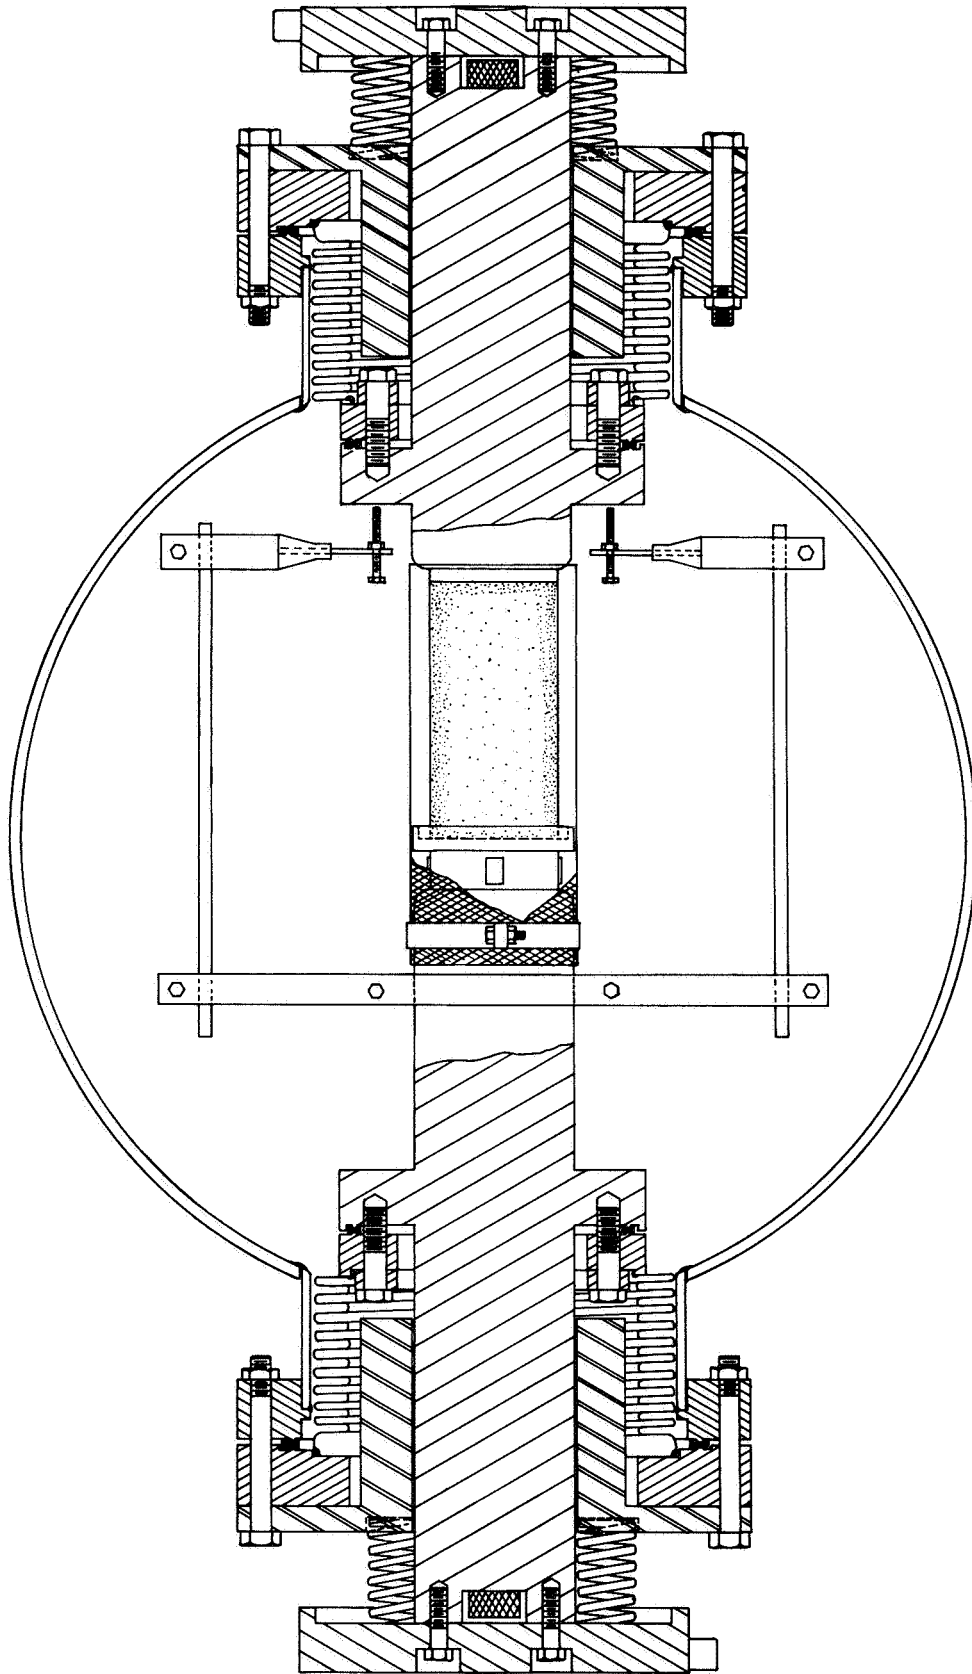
Compression Test Fixture for Use in the Vacuum Chamber.
